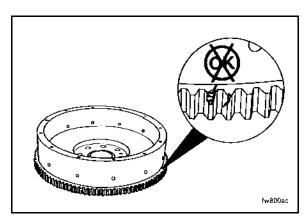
INSPECT THE FLYWHEEL RING GEAR TEETH
